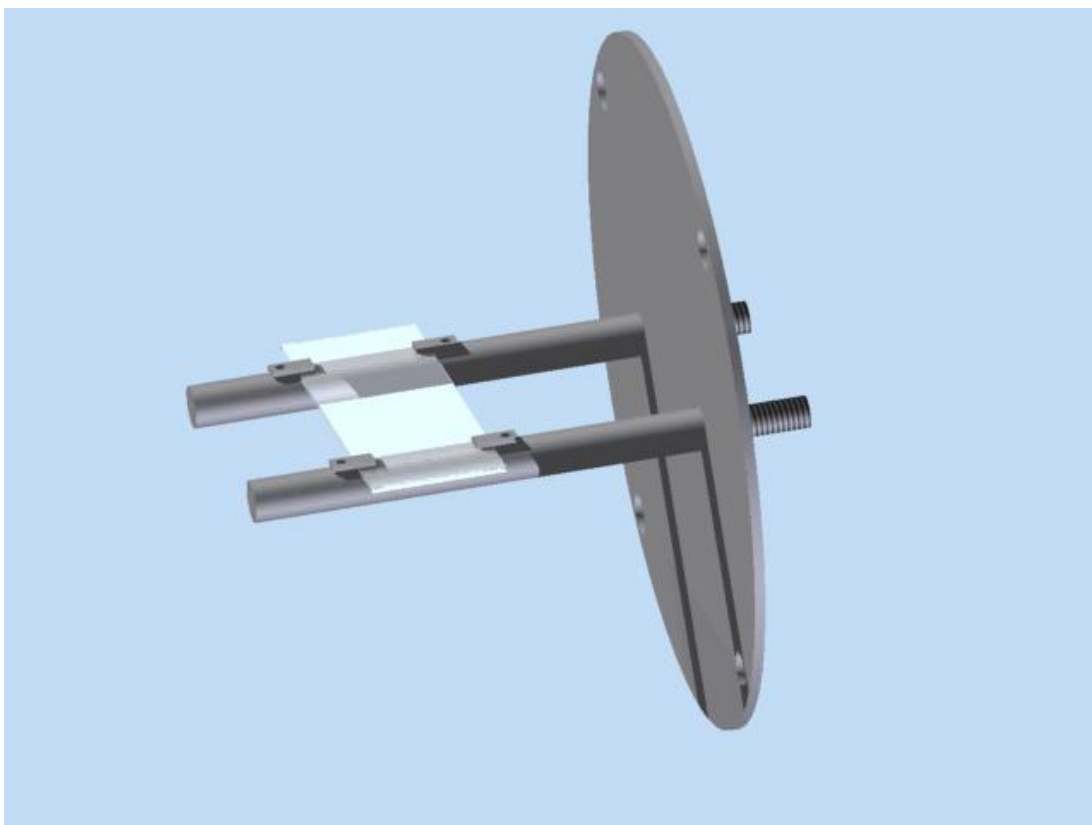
Autodesk Inventor drawing showing the microscope glass plate holder used to characterise the effusive molecular beam. The setup comprises of flange onto which two rods are mounted. The glass plate is held in positions with four washers. The drawings for the three different components are shown below.
